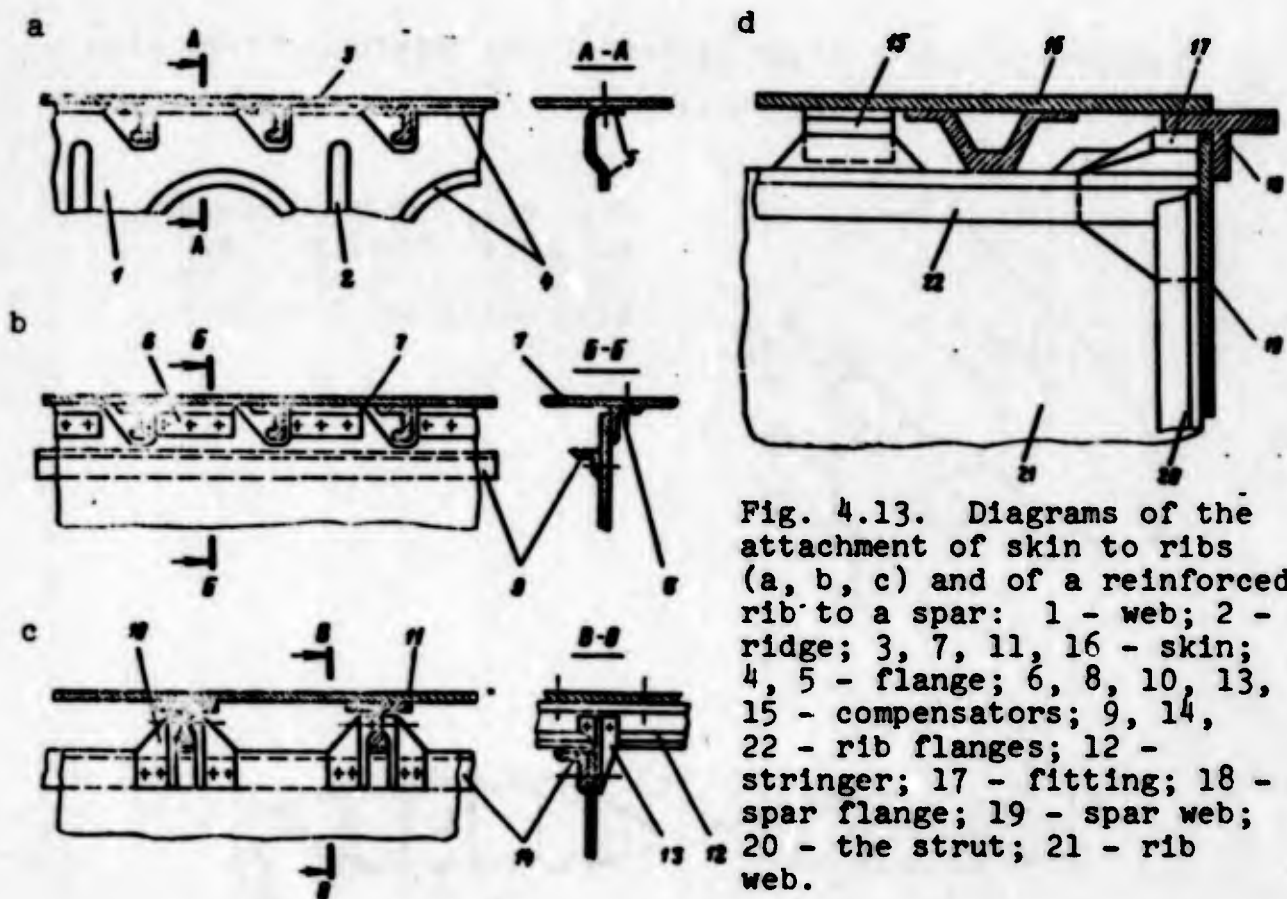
Diagrams of the attachment of skin to ribs (a, b, c) and of a reinforced rib to a spar: 1 - web; 2 - ridge; 3, 7, 11, 16 - skin; 4, 5 - flange; 6, 8, 10, 13, 15 - compensators; 9, 14, 22 - rib flanges; 12 - stringer; 17 - fitting; 18 - spar flange; 19 - spar web; 20 - the strut; 21 - rib web.
